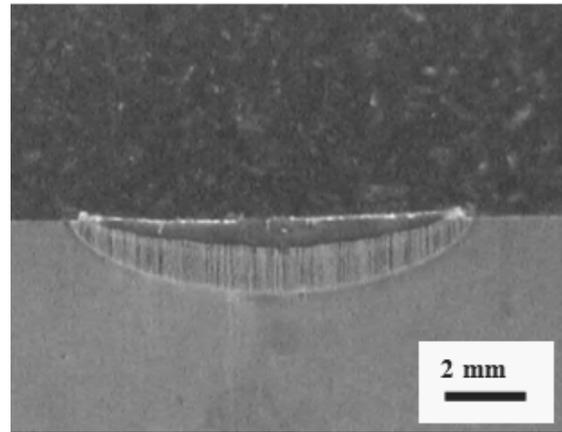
Shape and thickness of cross-section of the laser remelted samples, alloyed with laser power of 1.2 kW, VC
